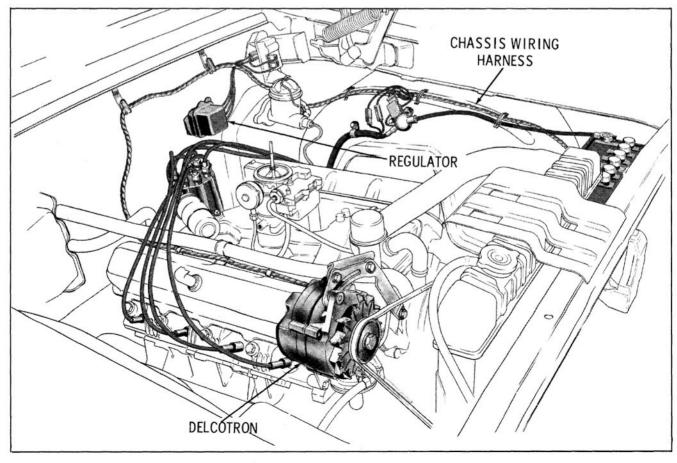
Chassis Wiring Harness (30-31 & 32 Series V-8)
